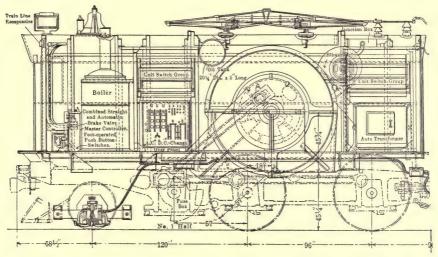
New Haven Freight Locomotive, Crank and Side Rod Type. Side Elevation.
